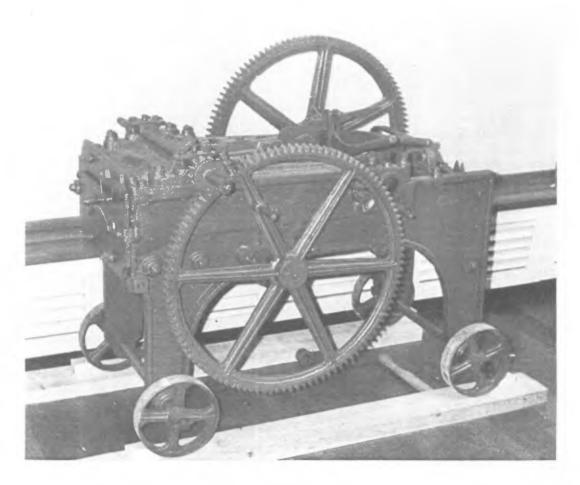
Brickmaking machine of the 1860s manufactured by Edward Page & Co of Bedford.
